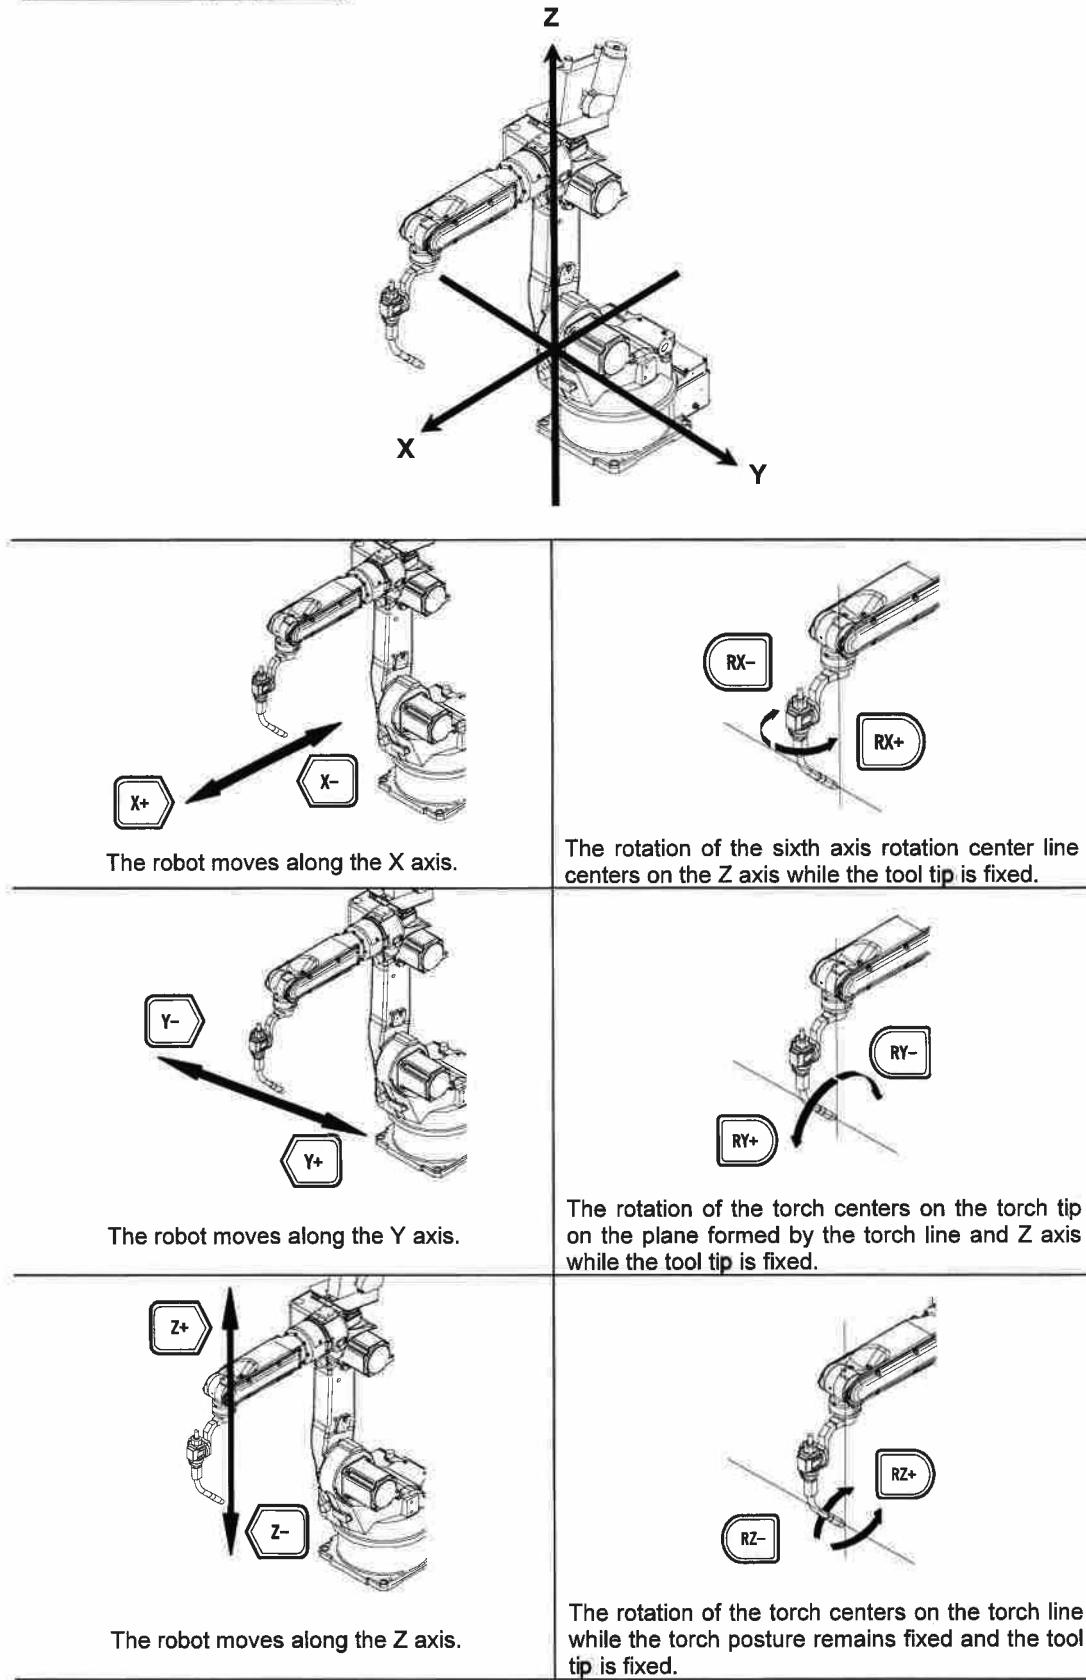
Movement directions in the machine coordinate system (for the arc welding application)
